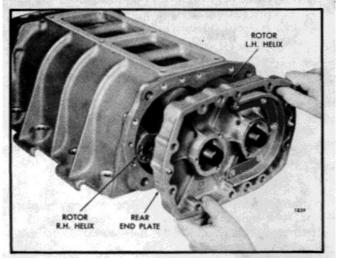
Installing Blower Rear End Plate (Lip Type Oil Seals) using Tool J 6270-5.
